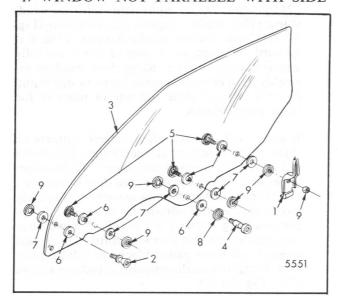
Front Door Window Assembly "A-37, 57 and 80" Styles
